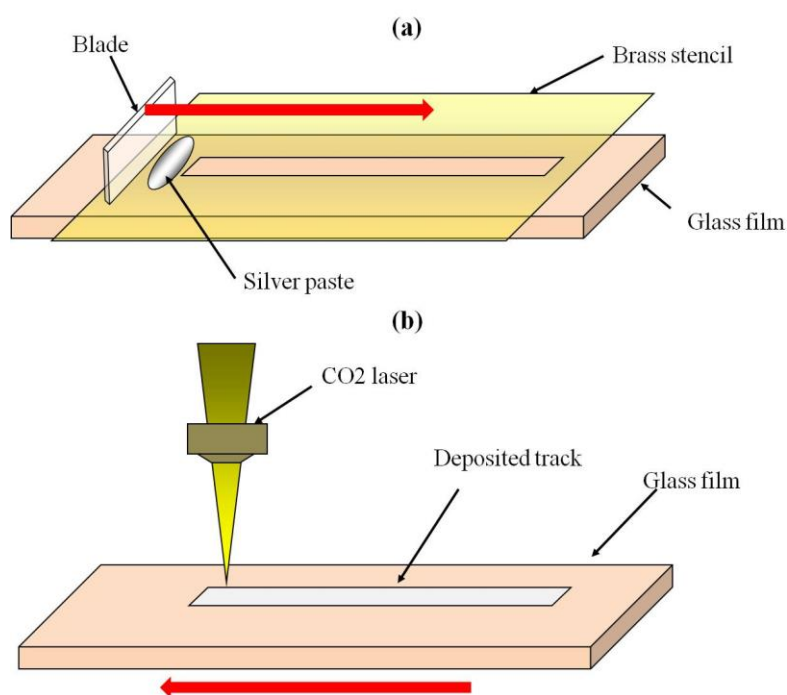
(a) Stencil printing method and (b) laser curing of deposited silver paste
